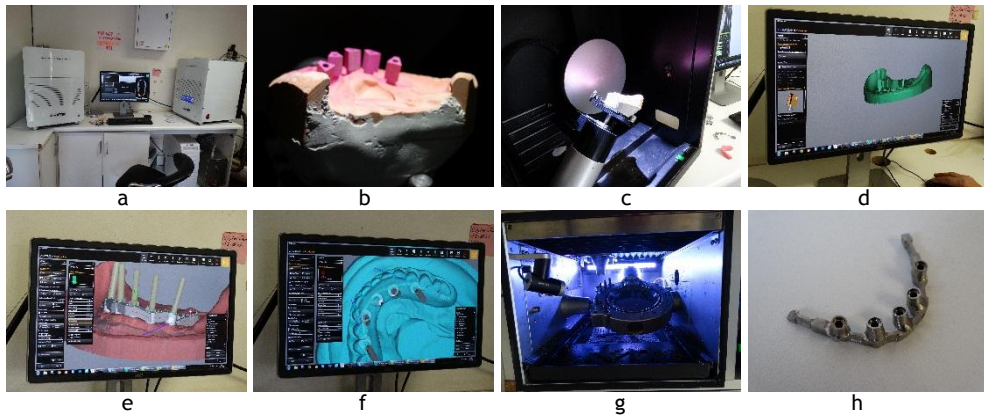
a-h Producing an overdenture frame through CAD/CAM
